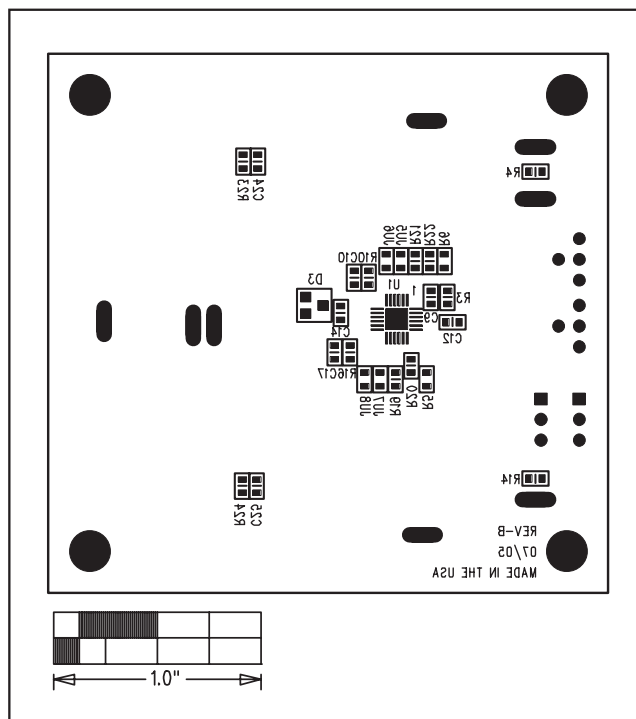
MAX8716 EV Kit Component Placement Guide—Solder Side
